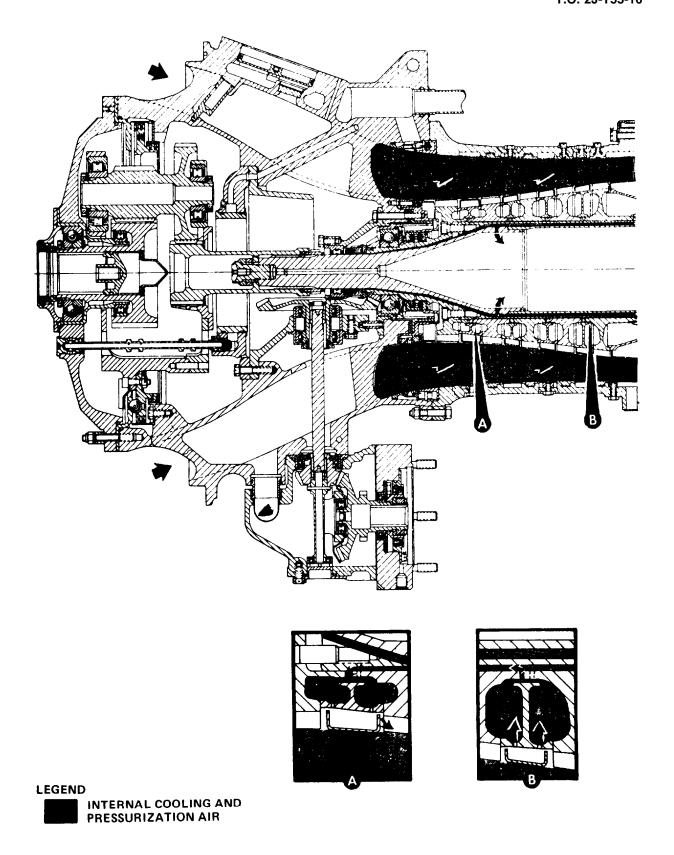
Internal Cooling and Pressurization System (T53-L-13B Engine) (Sheet 1 of 2)
